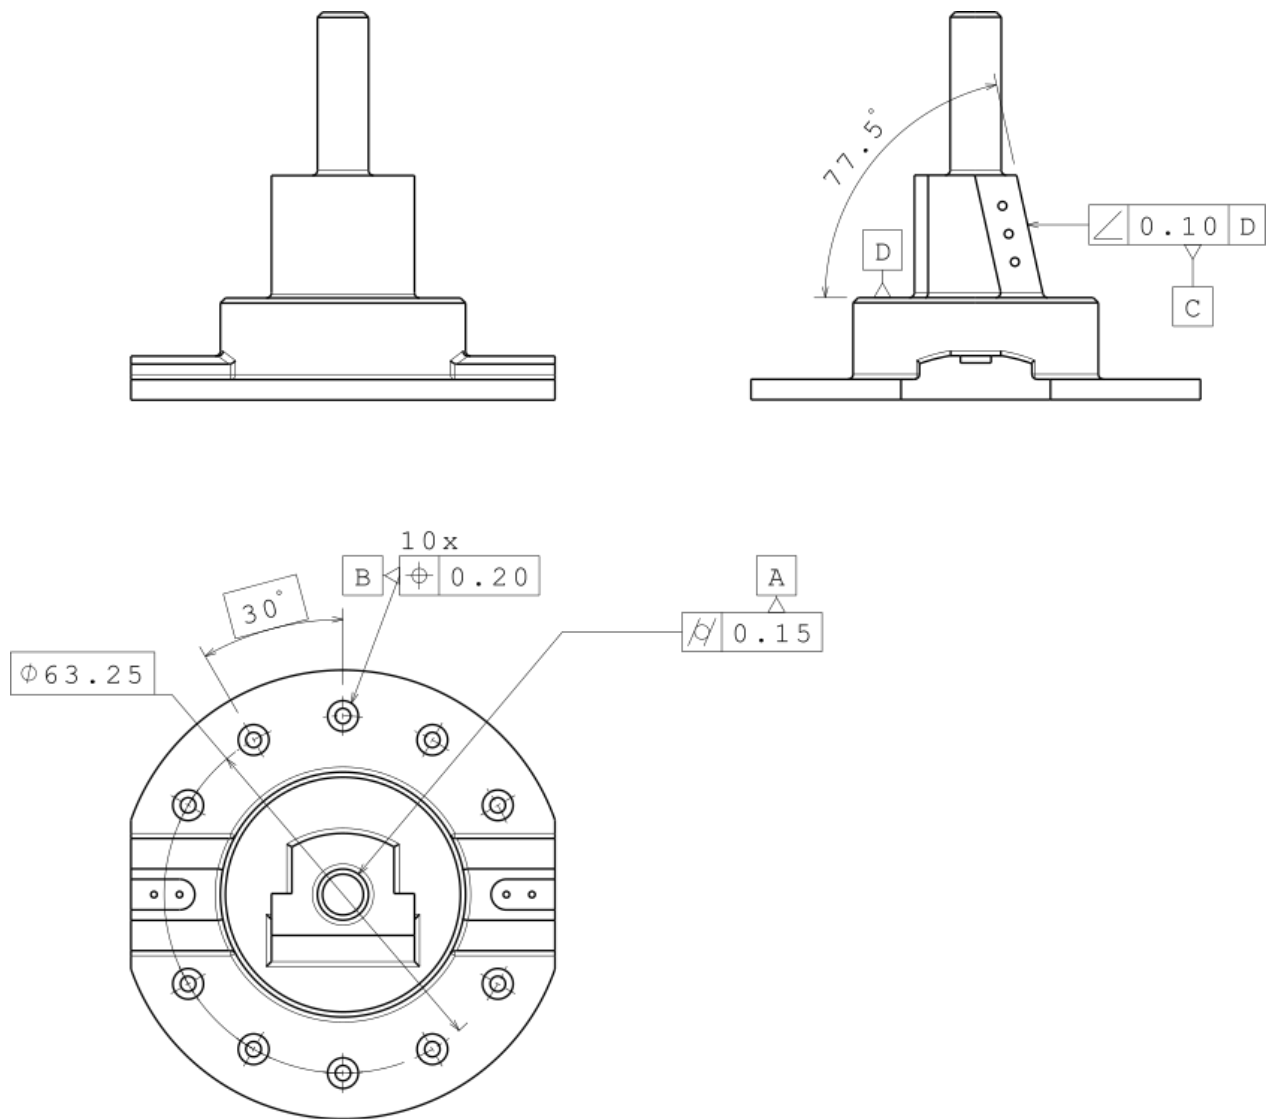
Drawing of the part with the toleranced features to inspect. Unless otherwise specified, dimensions are in mm.
